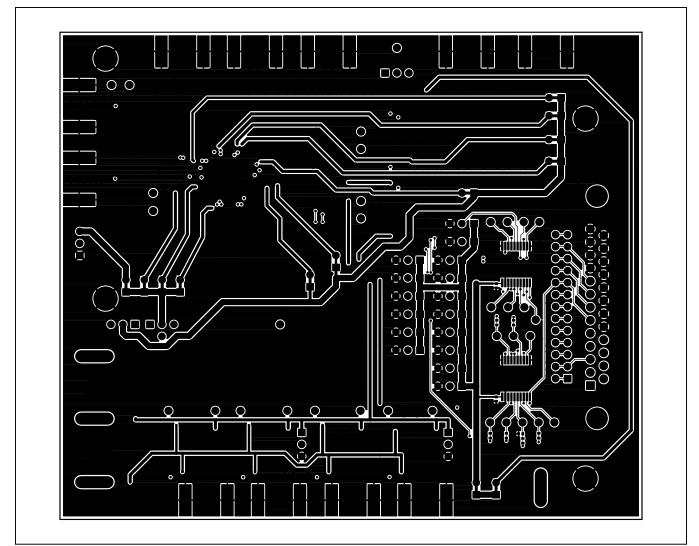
MAX2839 EV Kit PCB Layout—Solder Side
